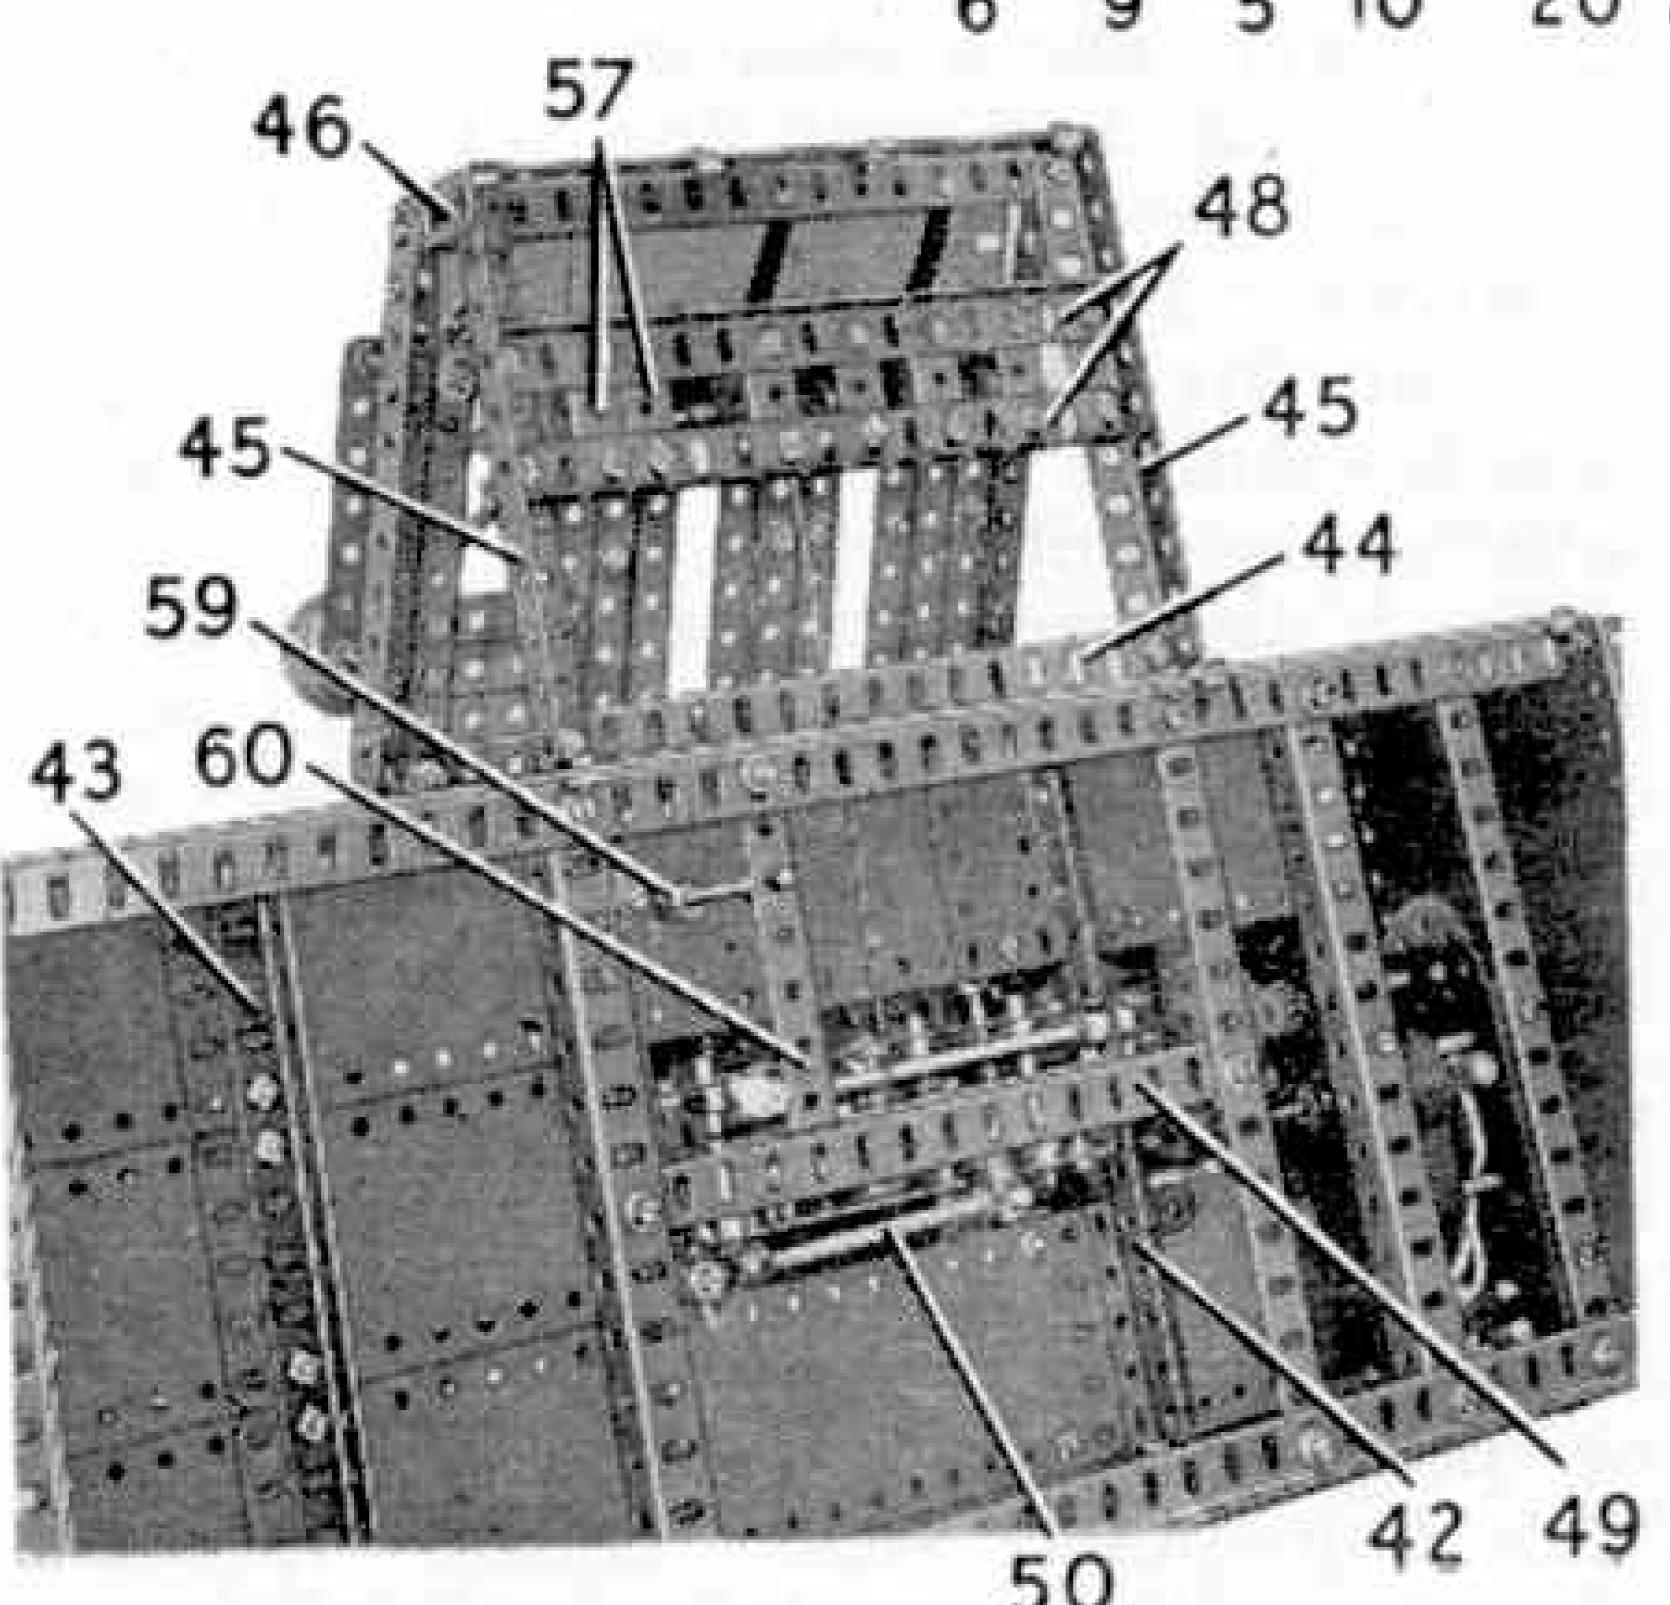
A detail picture of the control arrangements that link the gear lever, clutch and brake pedals to the Chassis.
